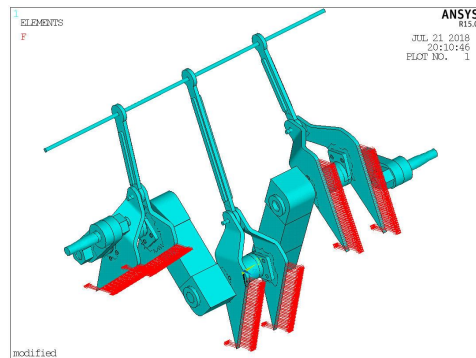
Loading applied on modified Vooor cutting Assembly for static analysis
